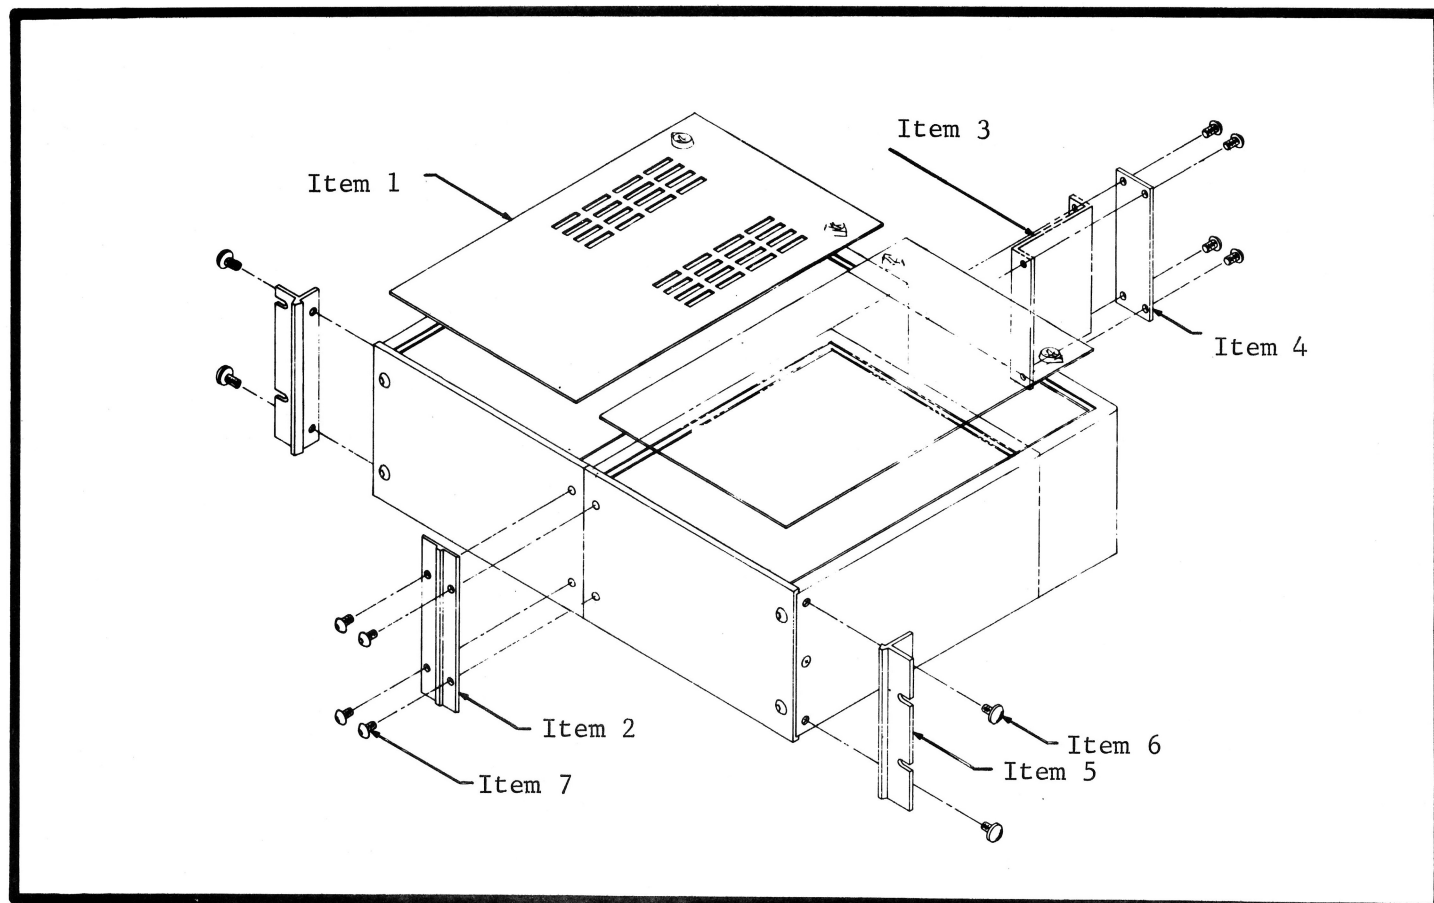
Exploded View of Model 4004A Rack Mounting Kit. Refer to Table 8 for parts list.
